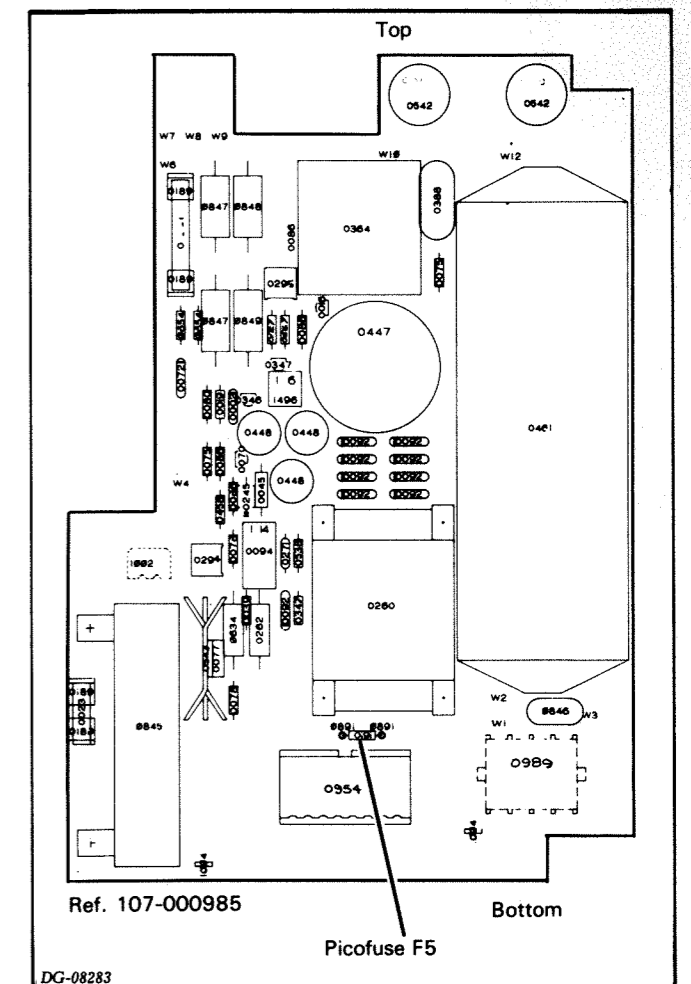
A LOCATION OF PICO FUSE ON PC BOARD INSIDE VNR UNIT
